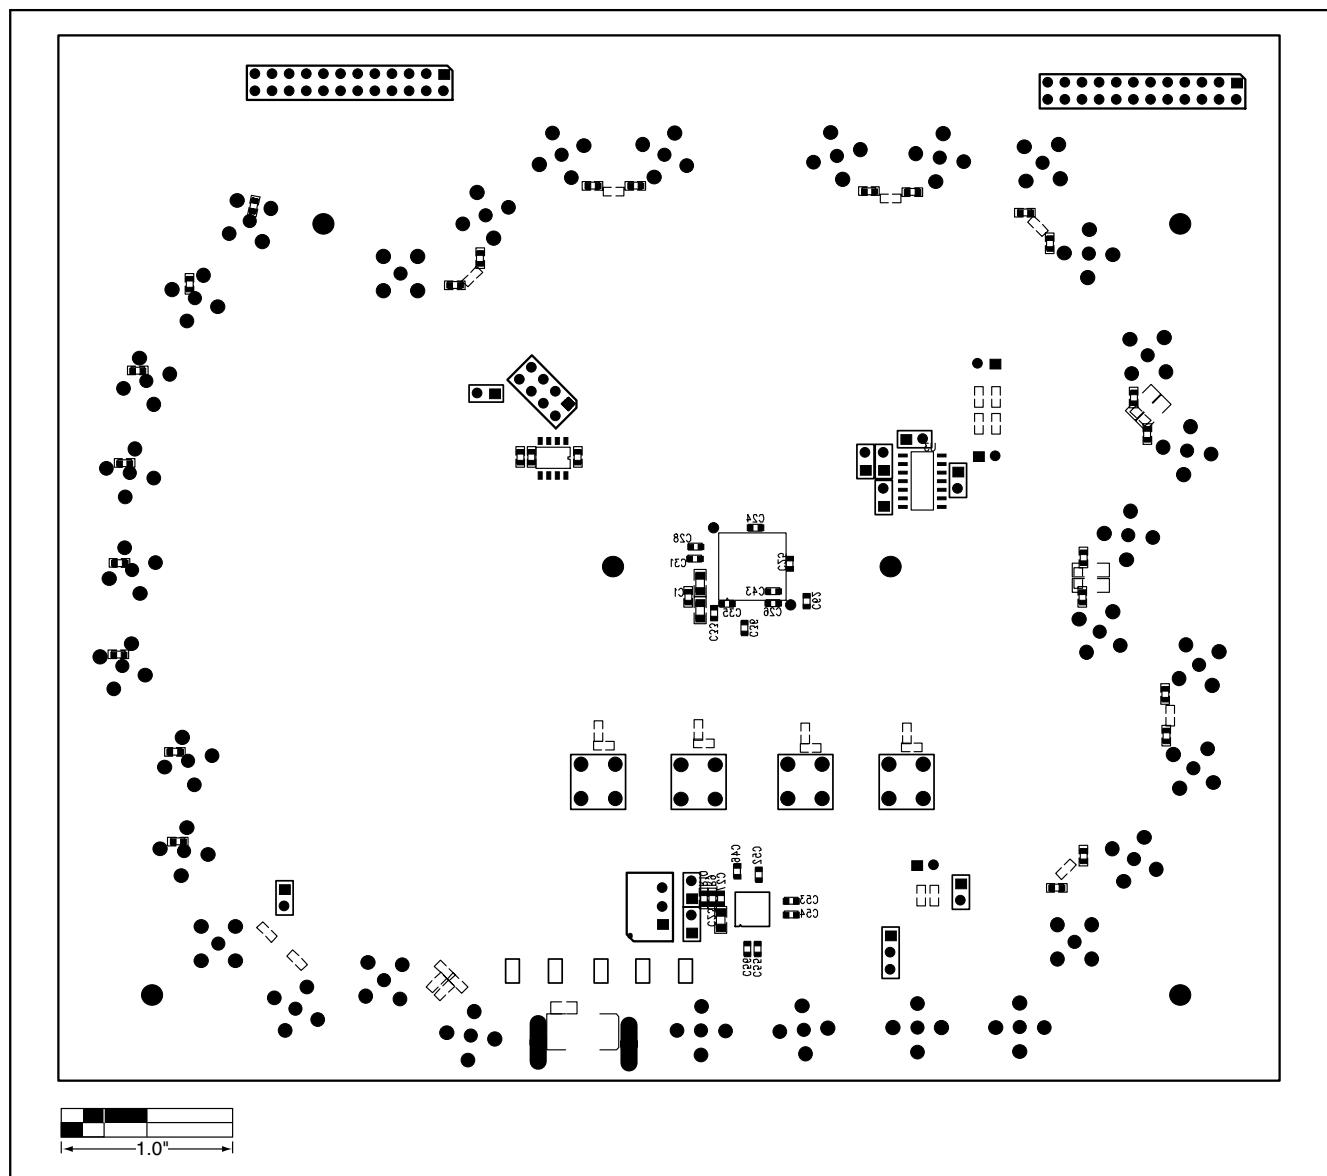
MAX3831/MAX3832 EV Kits Component Placement Guide—Solder Side
